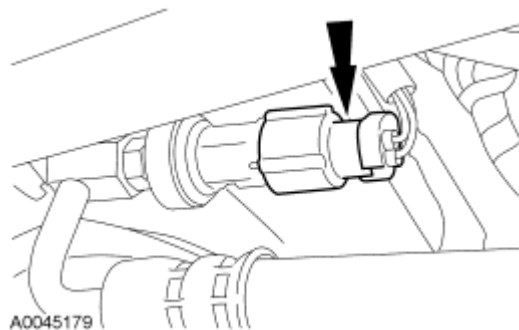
Power Steering Pressure (PSP) Switch Electrical Connector
